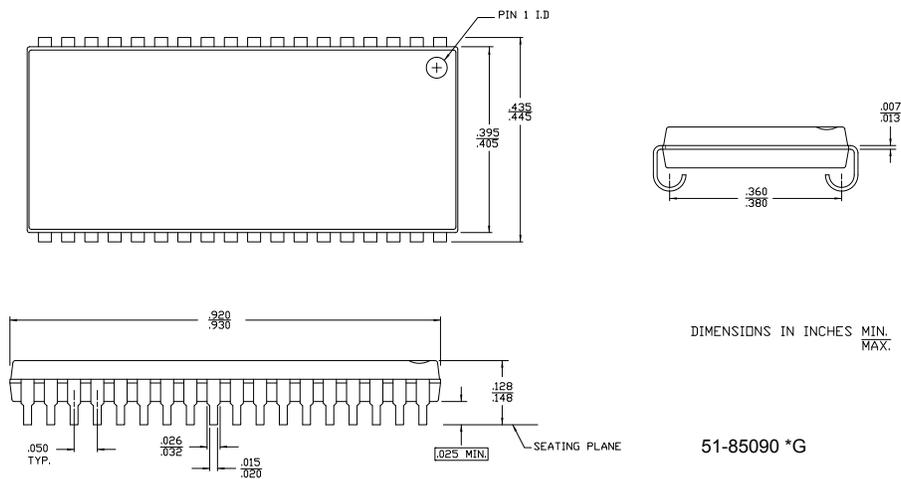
36L SOJ V36.4 (Molded) Package Outline, 51-85090
